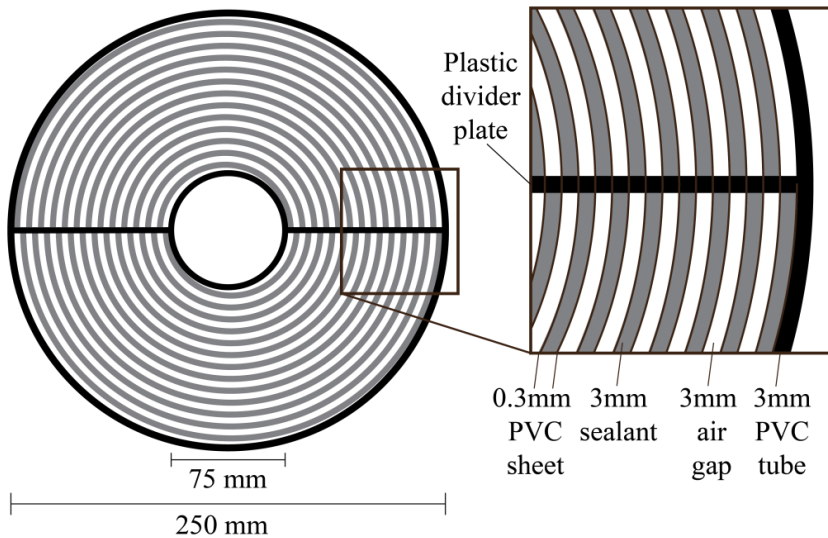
Face-view schematic of the developed heat exchanger for room-based ventilation. Its rolled construction facilitated manufacture and limited leakages.
